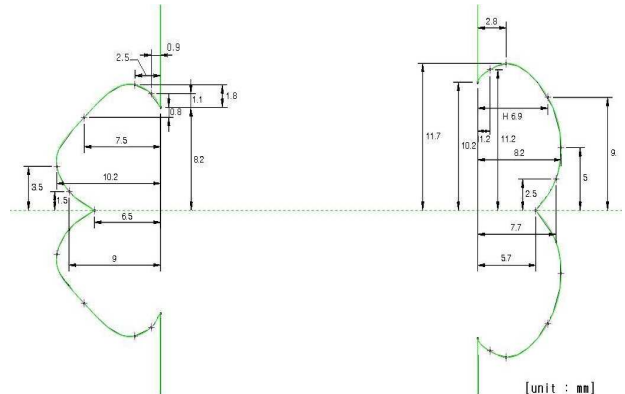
Geometric dimensions of the thermal butt fusion joint
